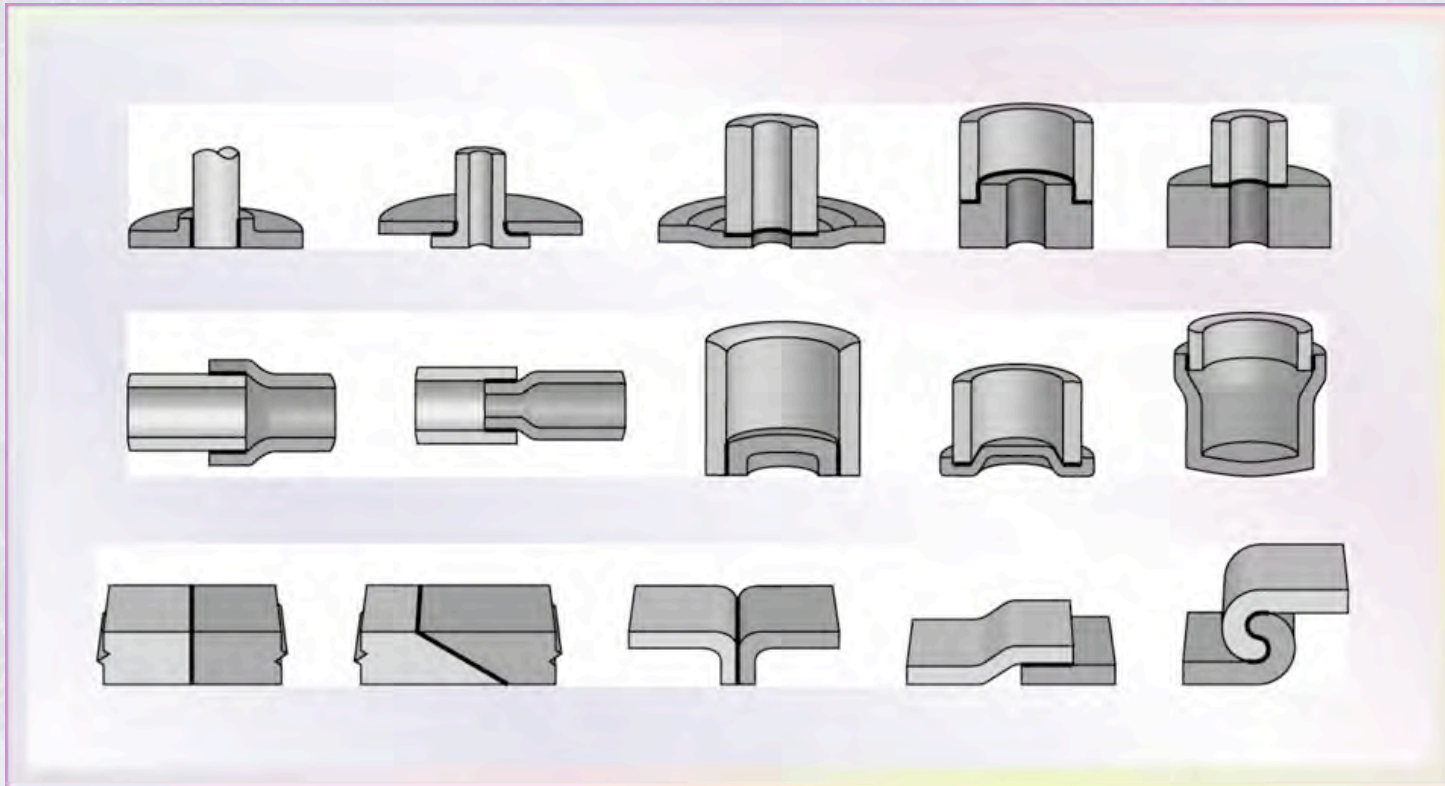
Joint designs commonly used in brazing operations. The clearance between the two parts being brazed is an important factor in joint strength. If the clearance is too small, the molten braze metal will not penetrate the interface fully. If it is too large, there will be insufficient capillary action for the molten metal to fill the interface.
